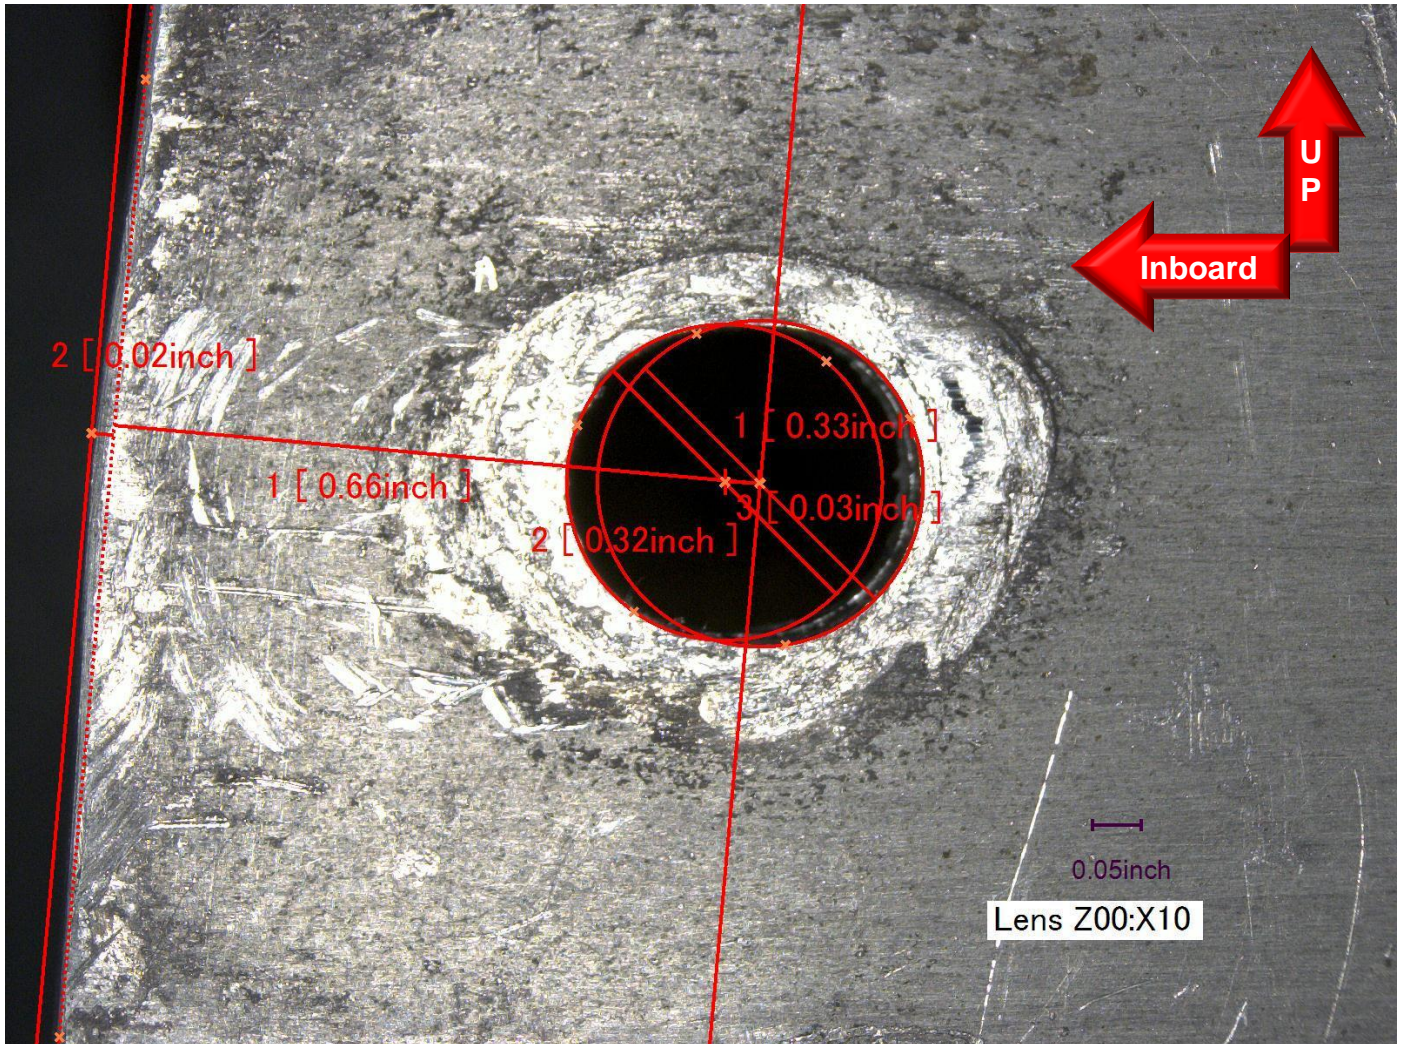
Closer view of the intact left wing fork attachment hole showing the inboard elongation of the hole and surrounding damage. Also the bulge is measured at the left.
